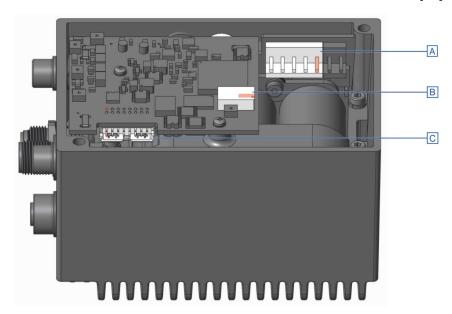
Connector arrangement: motor [X6], holding brake [X6B] and angle encoder [X2]
